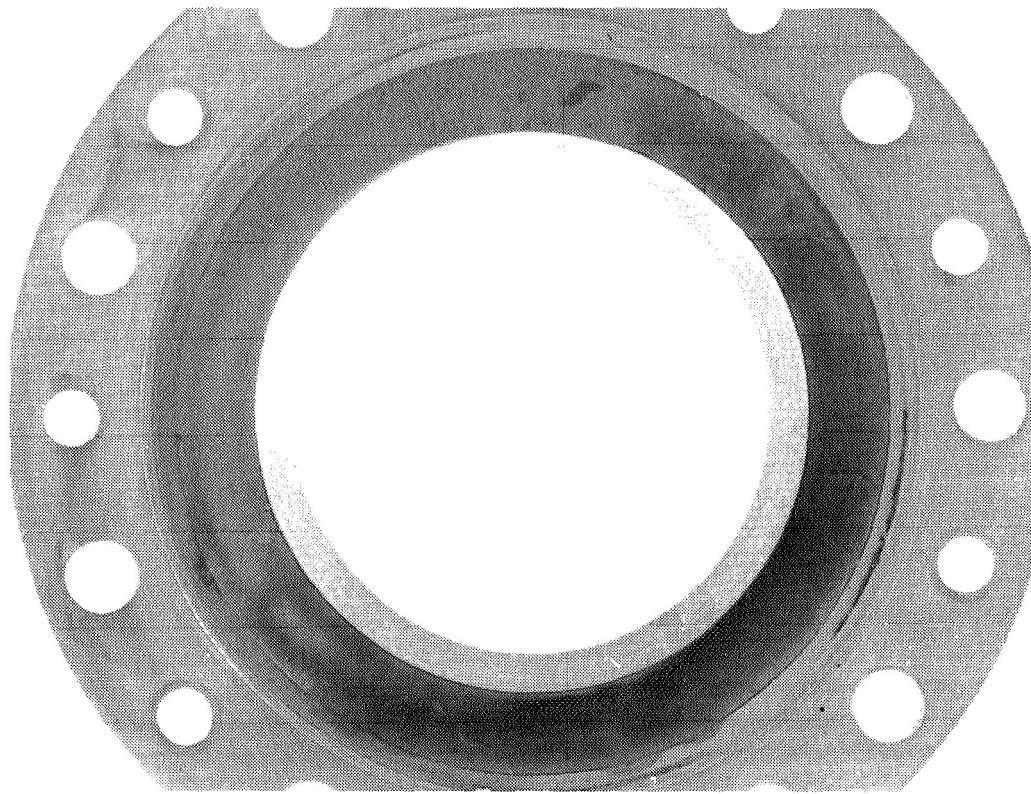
1 Valve Seat (Rear View) After Task III Testing
